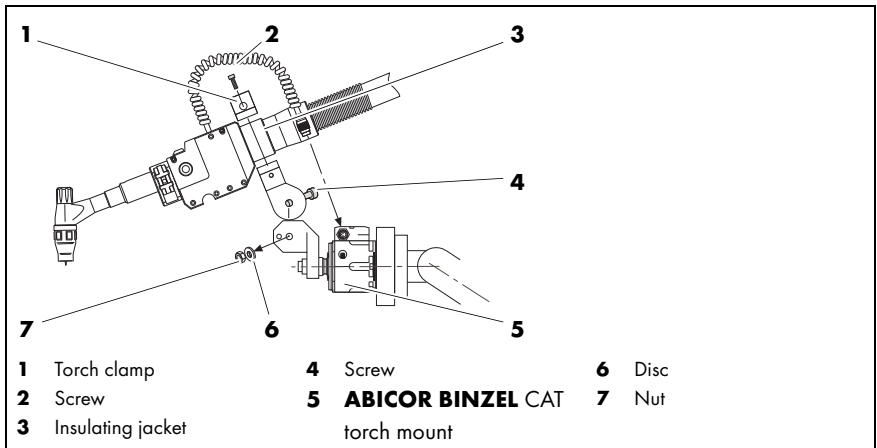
Mounting the TIG welding torch system on the robot
